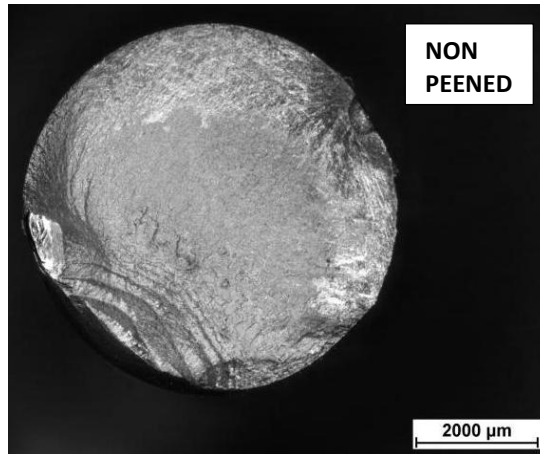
2. Fracture surface observation by stereomicroscope
